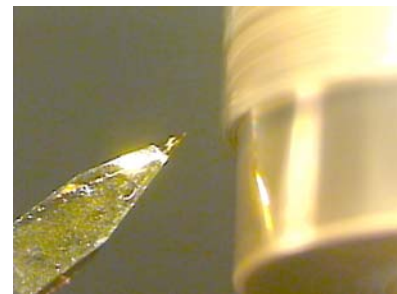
Machining of the barrel of the holder for centering of the component after it has been removed and returned to the diamond turning machine.
